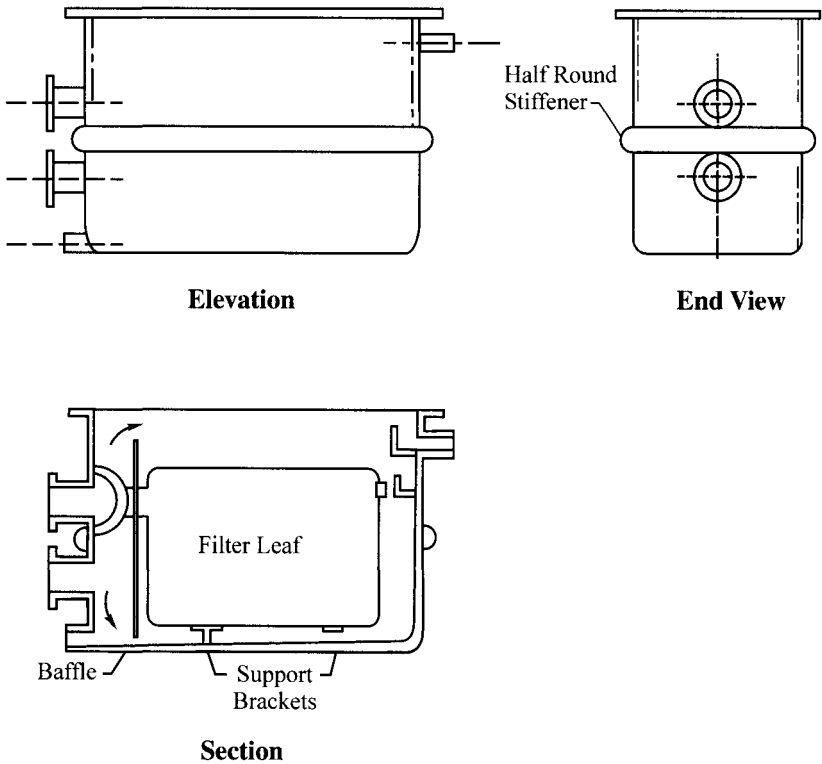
Typical Details—Vacuum Filter, Fiberglass Reinforced Polyester Construction
